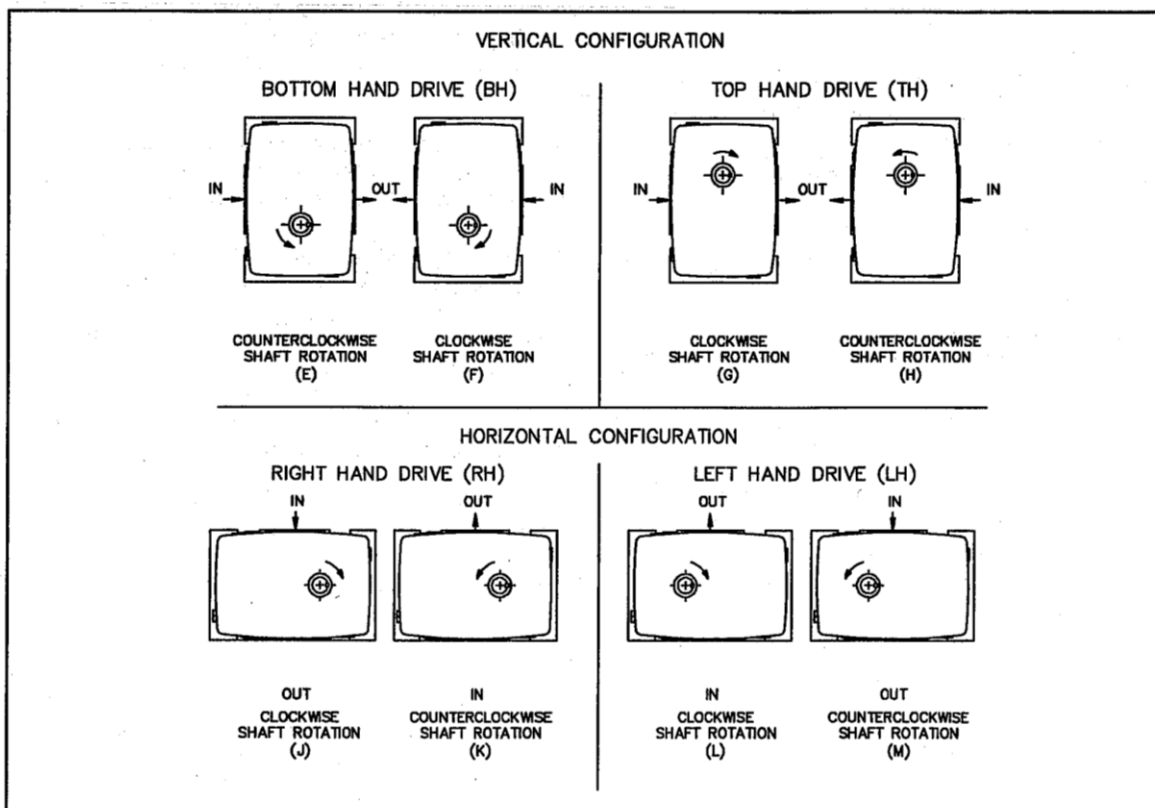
BLOWER MOUNTING CONFIGURATIONS
